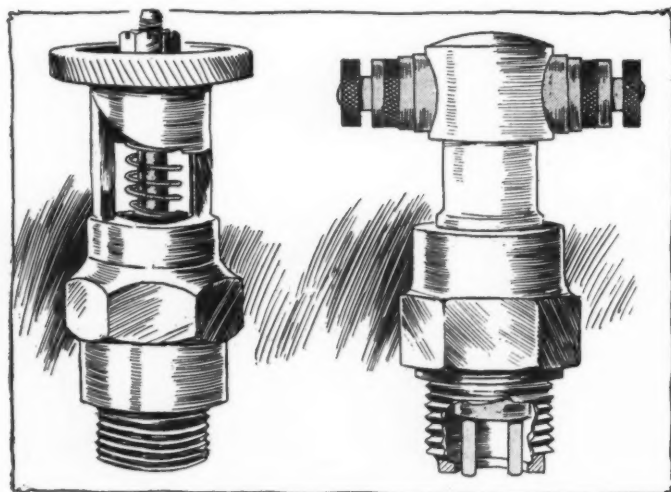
Endrick motor decompressor and Superior double spark-plug
